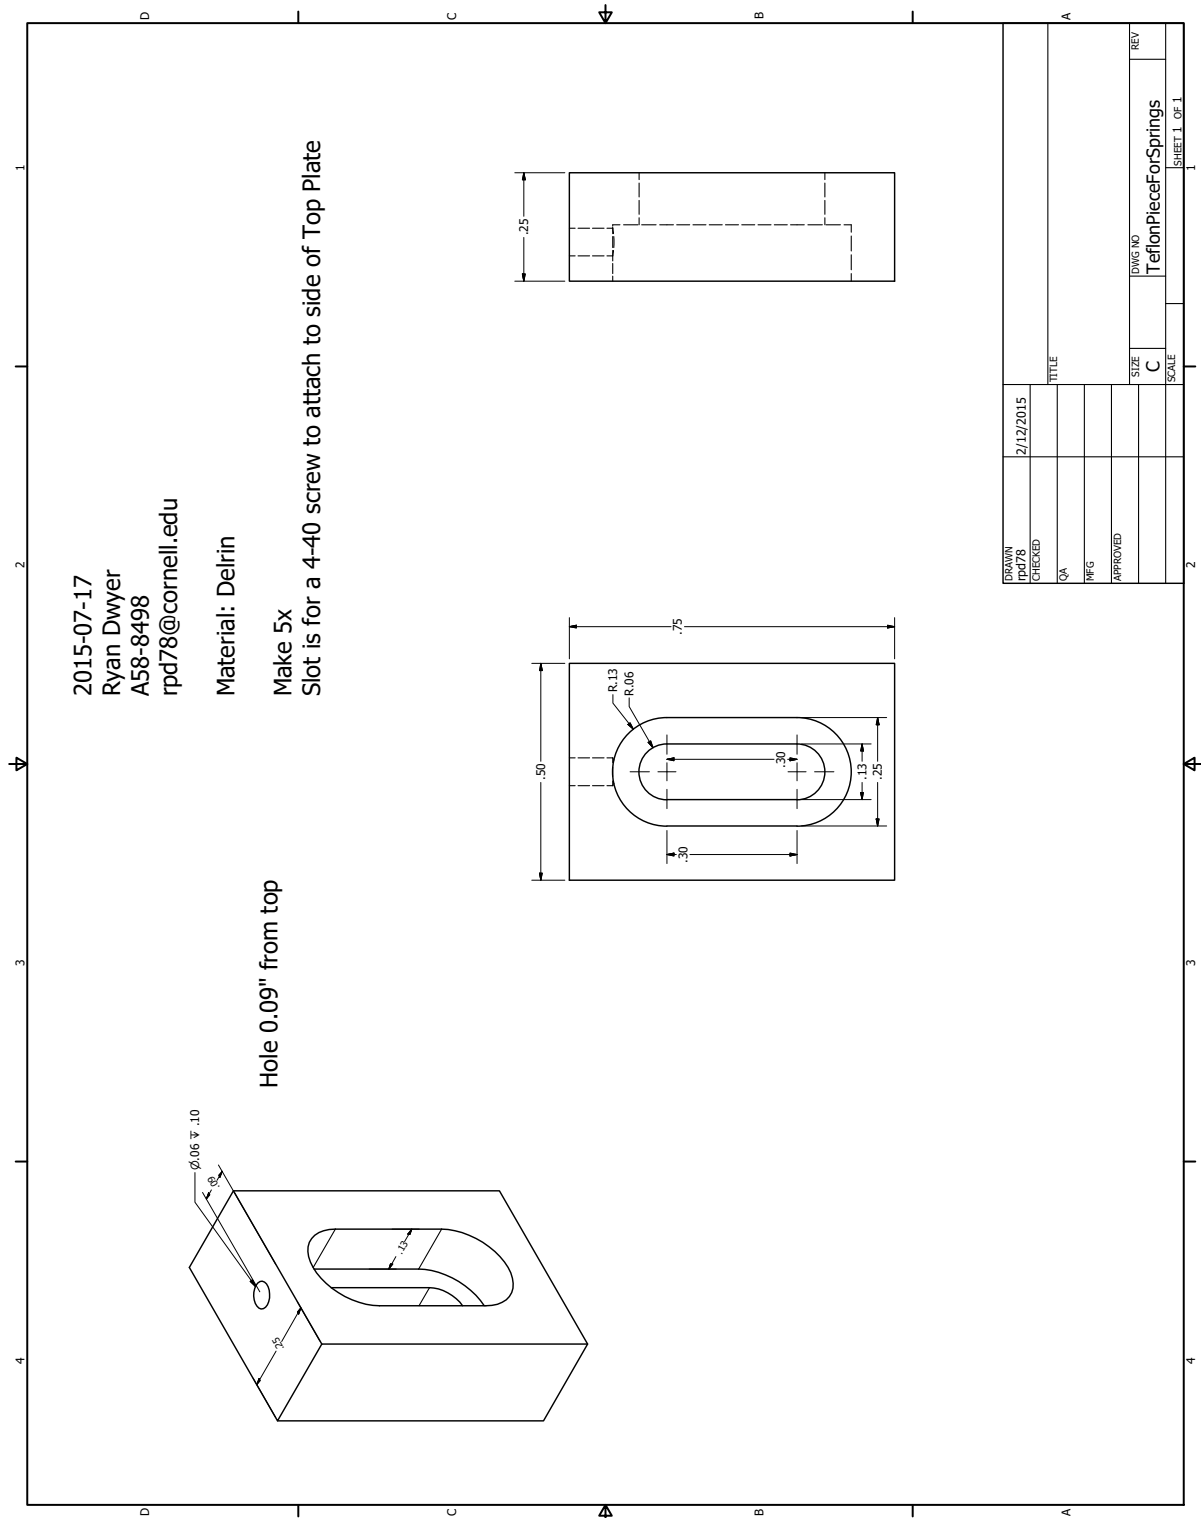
Teflon pieces for attaching springs. The spring attaches to the bottom hole.
